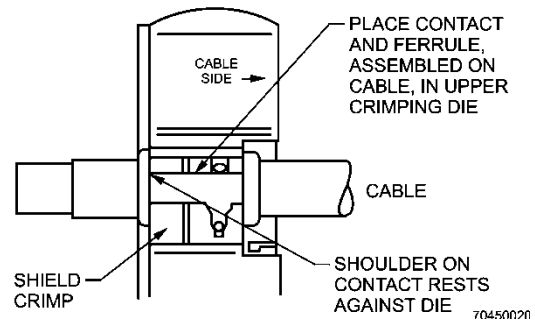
Contact-Ferrule Assembly in Ferrule Crimping Die of Crimping Tool AMP 220015-1 Ready for Crimping
